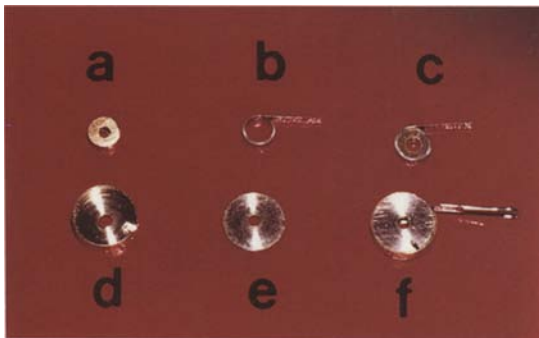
The parts of the DS retractor: (a) drum, (b) constant force spring (CFS), (c) CFS mounted on the drum, (d) spring box (SB), (e) spring cover and (f) DS retractor.
